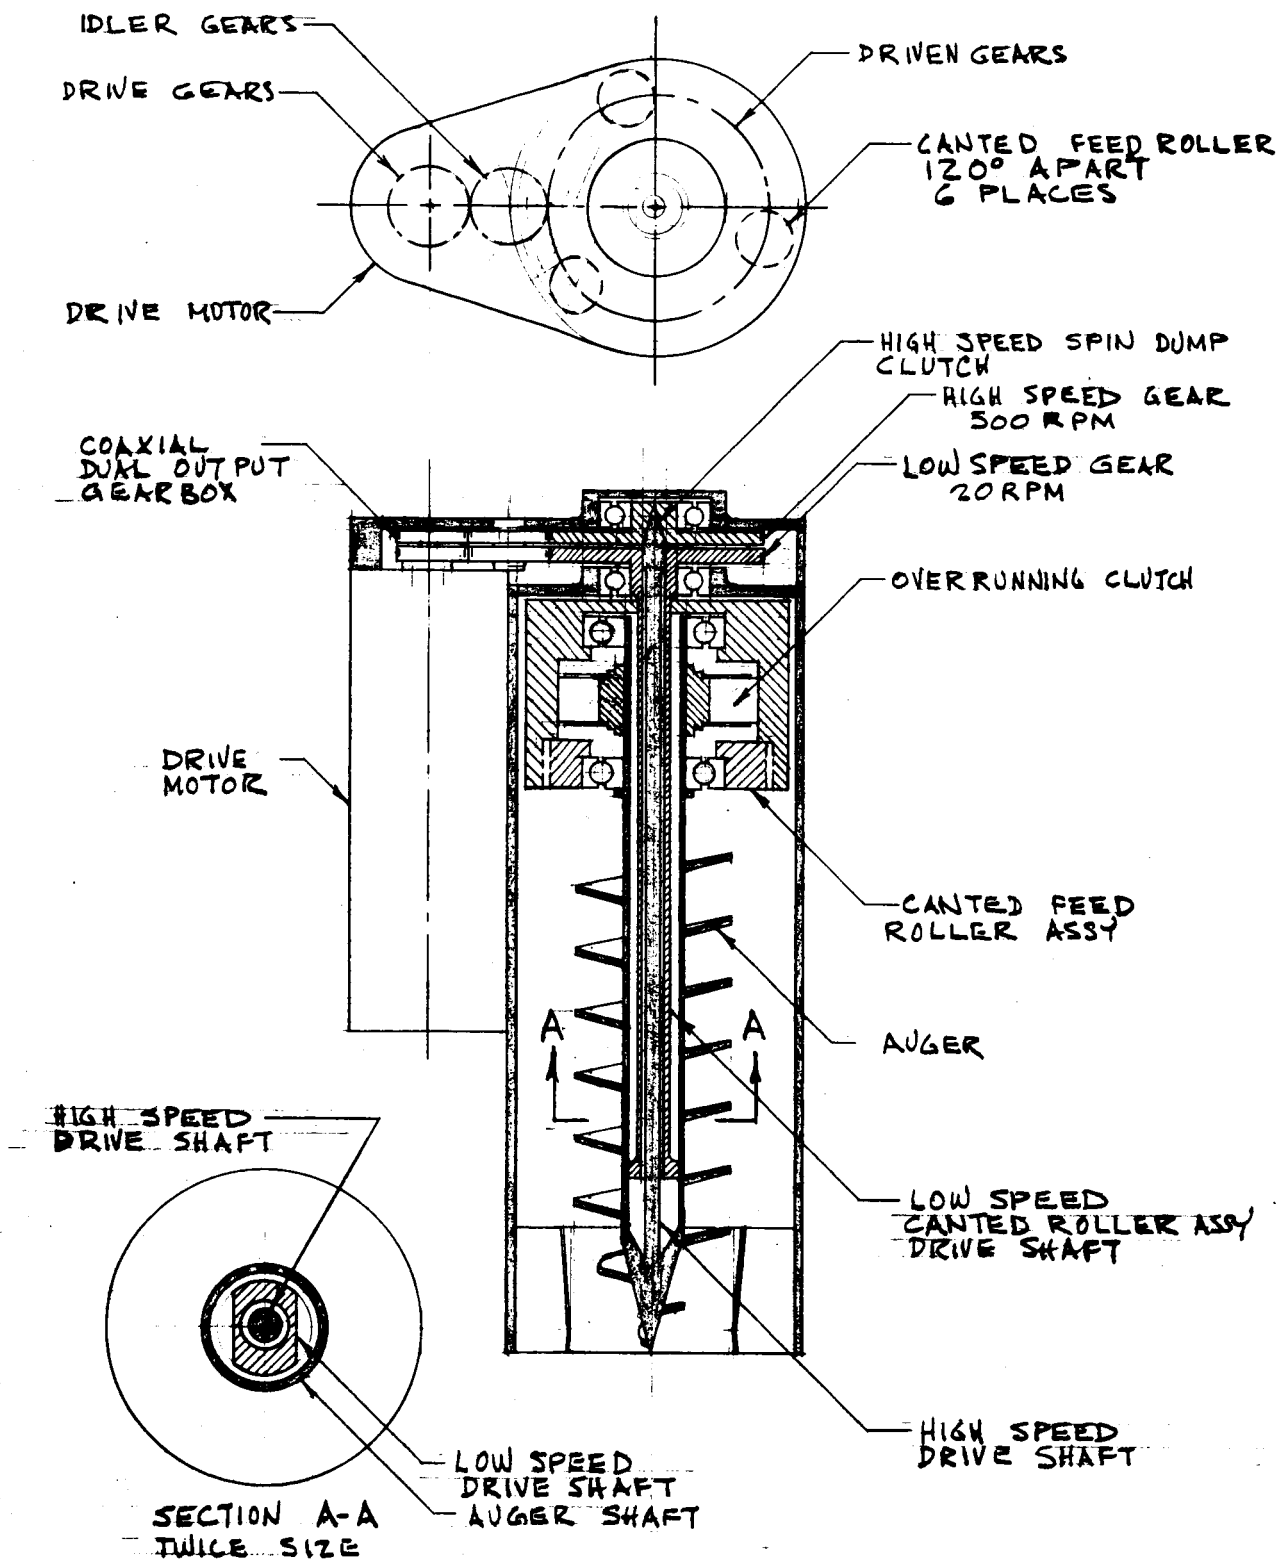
SOIL AUGER-CANTED FEED ROLL DRIVE
